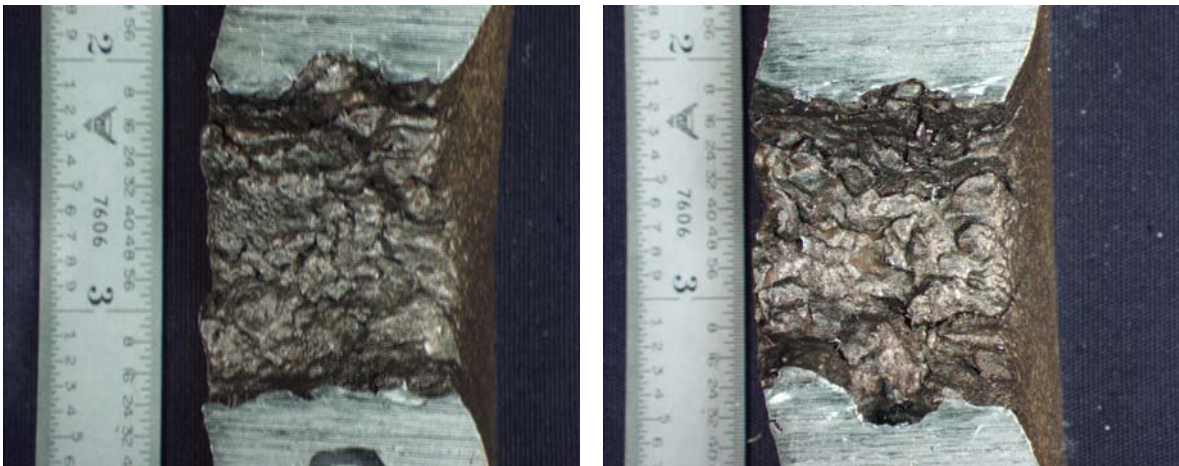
Matching halves of the cross-sectional view of the second witness plate.
